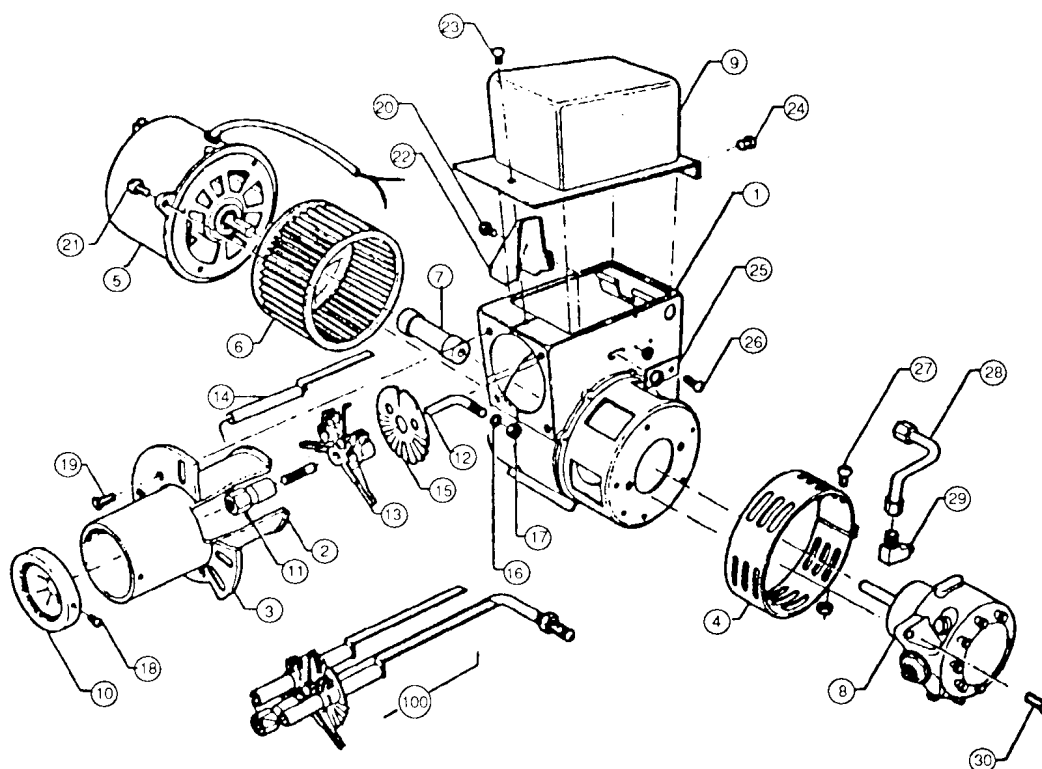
BECKETT BURNER MODEL AFG60YHHS EXPLODED ASSEMBLY
